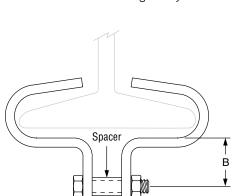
LOADS (LBS) • DIMENSIONS (IN)
